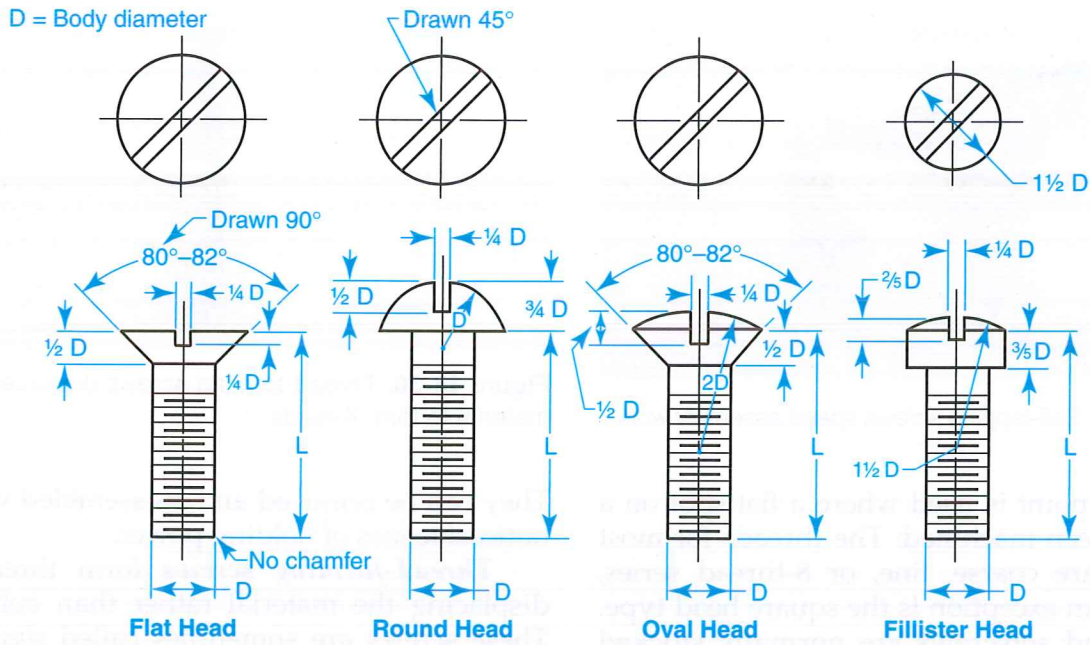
Drawing conventions for standard machine screws. Approximate dimensions are shown.
